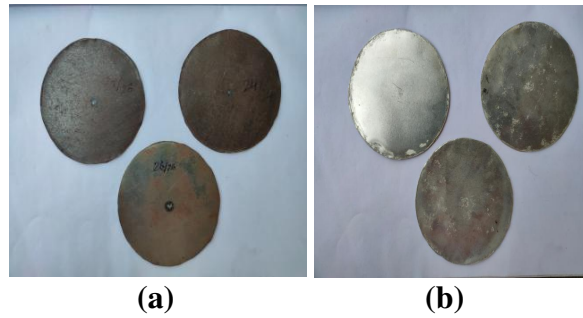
Spot welded joints of (a) mild steel and (b) aluminium modeling of Spot Welding Using ANSYS APDL
